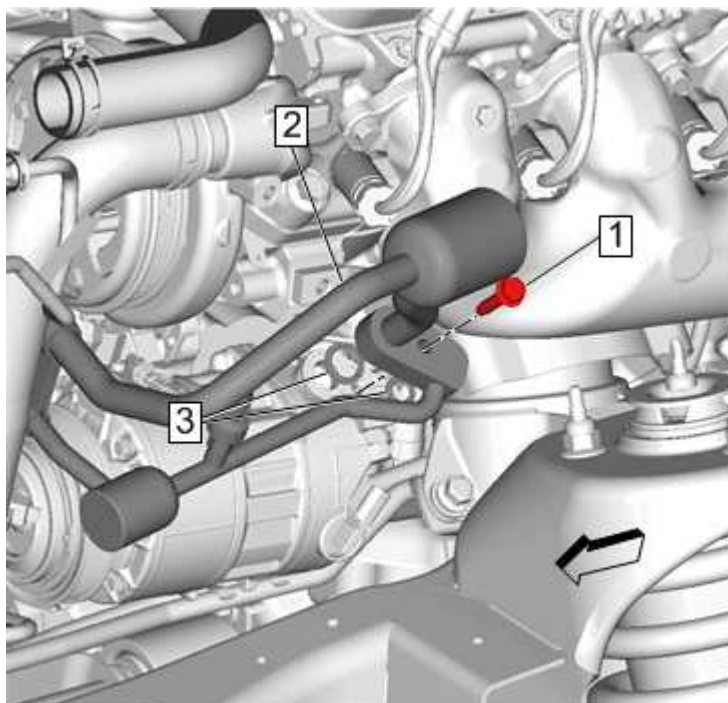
Air Conditioning Compressor Hose, Bolt And Seal
